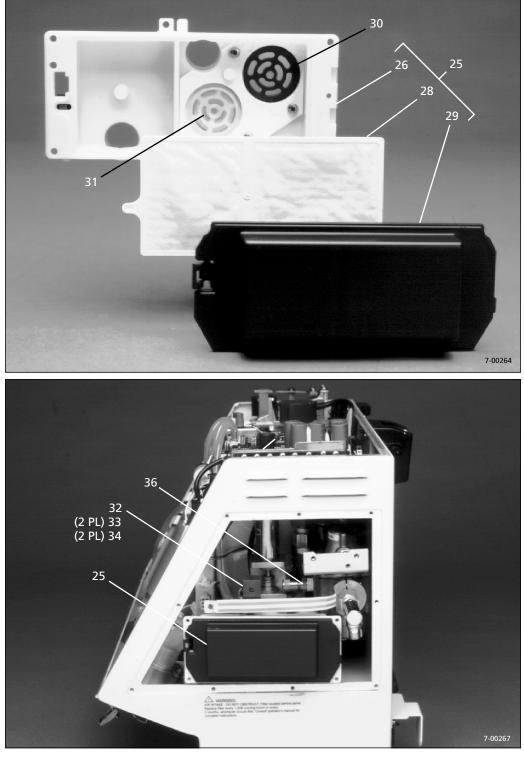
Ventilator head assembly (Sheet 2 of 2)
